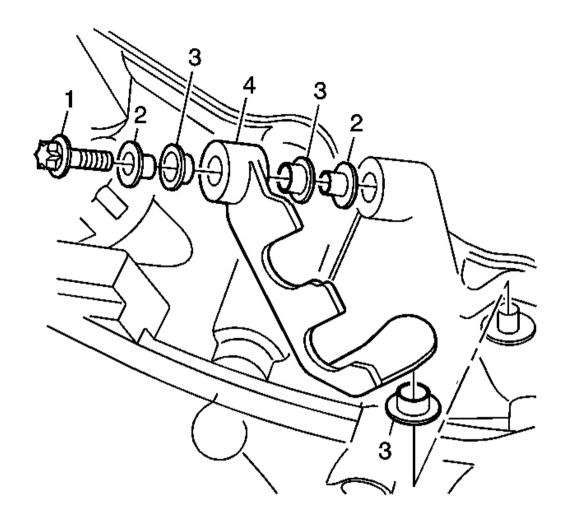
View Of Shift Cable Bracket Assembly Courtesy of GENERAL MOTORS CORP.
